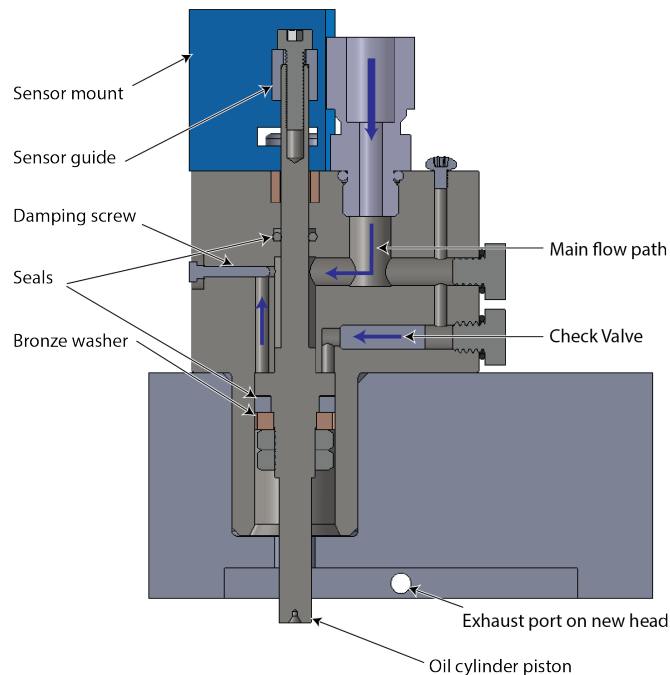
Section view of cushion device assembly showing components necessary for sealing fluid, damping valve closing speed, and sensing linear position
